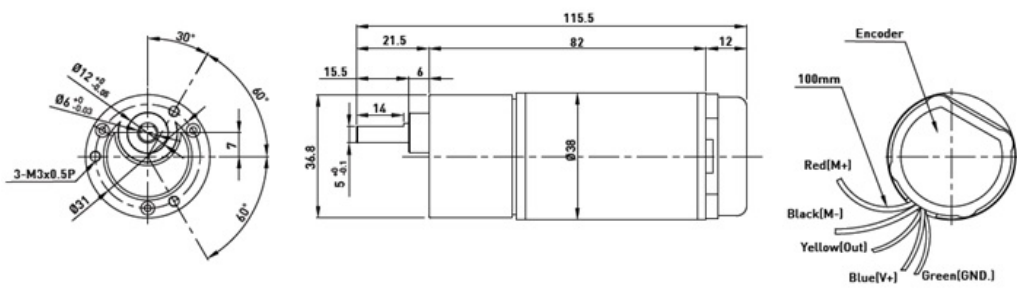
A commercial DC commutator motor with a gear head [20]
